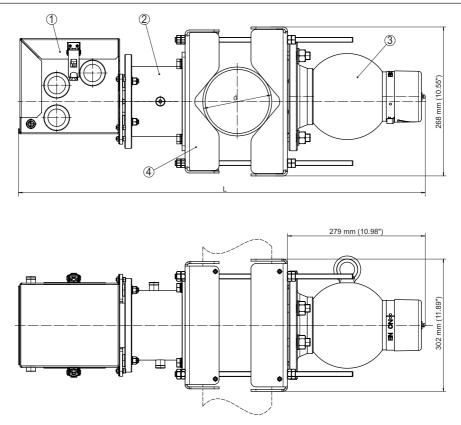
Mounting bracket with horizontally mounted sensor and air cooling (with VEGASOURCE 31, 35)
